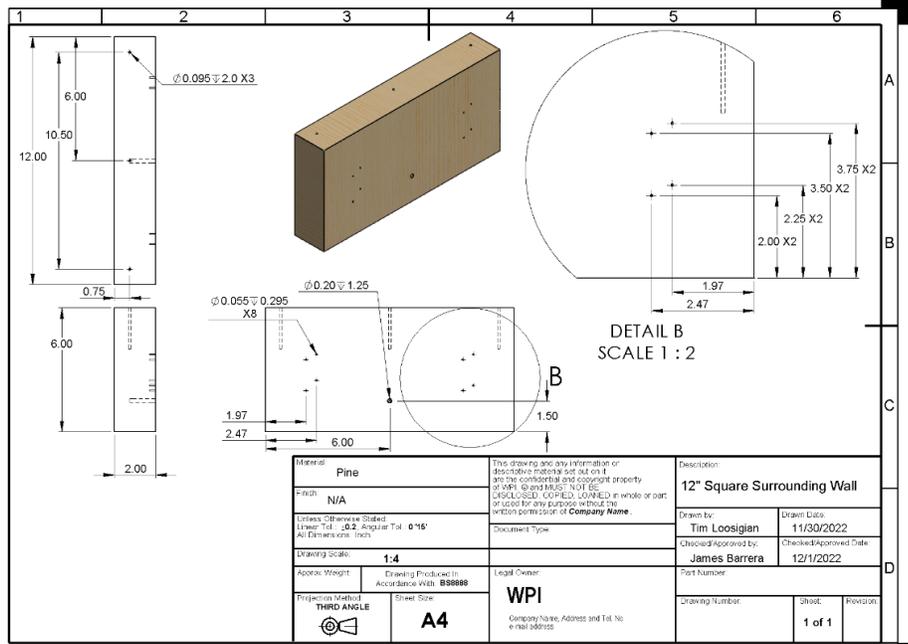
Technical drawing of 12-in. long 2-in. x 6-in. square surrounding wall with pre-drilled holes
